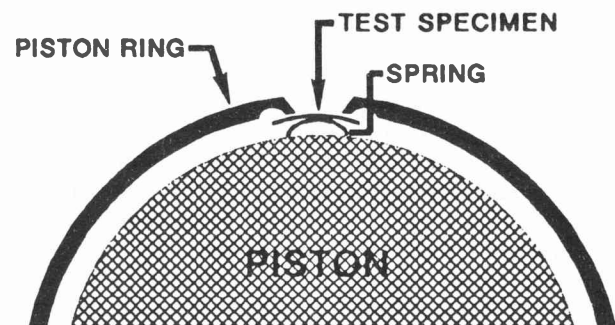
Horizontal section through piston depicting the scribes, aluminium specimen and spring.
